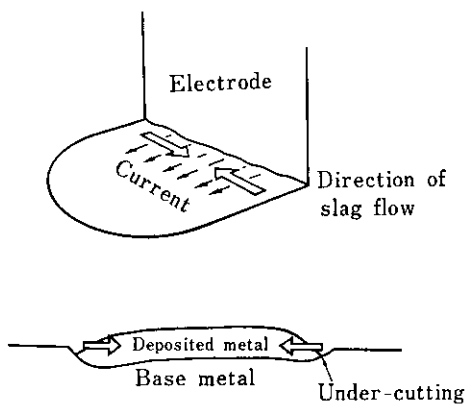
Schematic mechanism of under-cutting caused by parallel welding current
